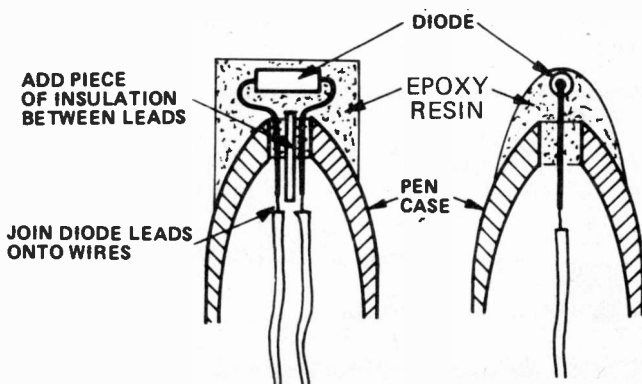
This diagram shows how the sensor is mounted into a ball-point pen casing or similar.
